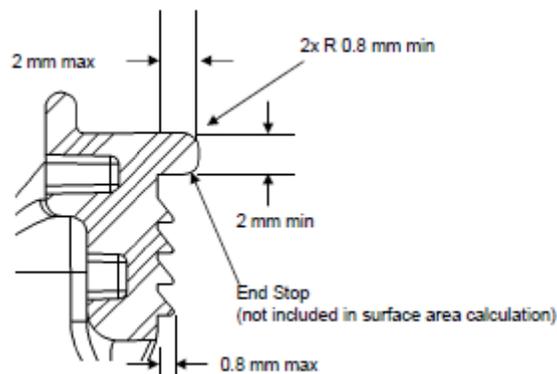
Section View - Dimensions of Optional Contact Surface Features
